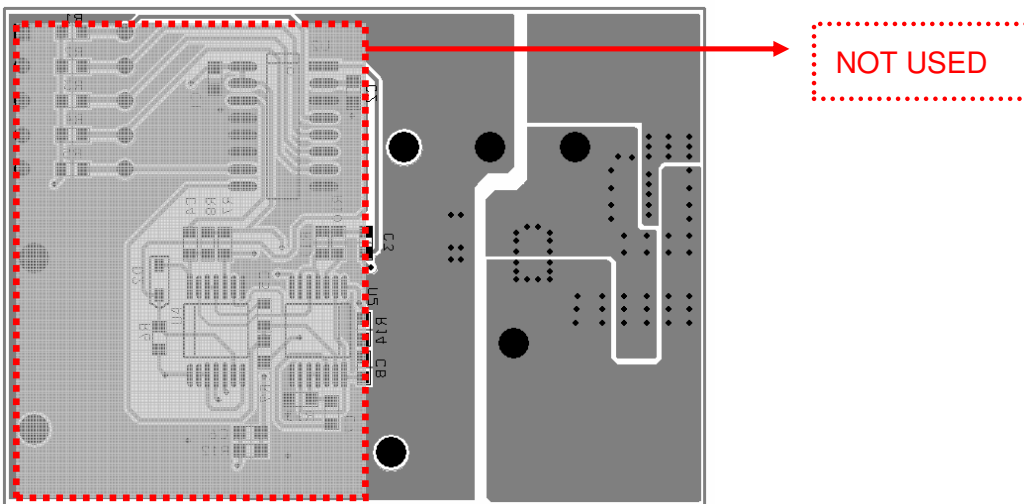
SP7686EB PC LAYOUT BOTTOM SIDE
